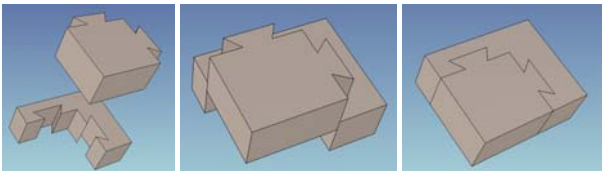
Micro Mold for Thermo-forming Process Made with wirePATH Method.
